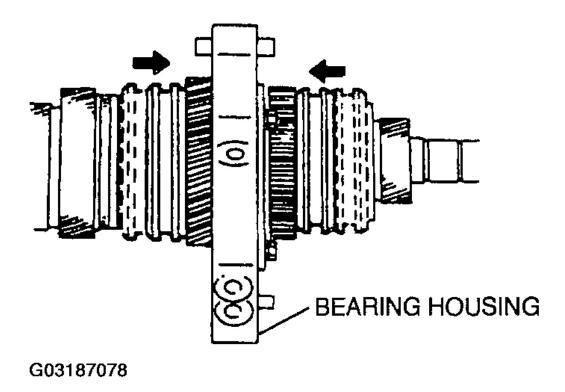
Shifting Clutch Hub Sleeves Into 1st & Reverse Gears Courtesy of MAZDA MOTORS CORP.
